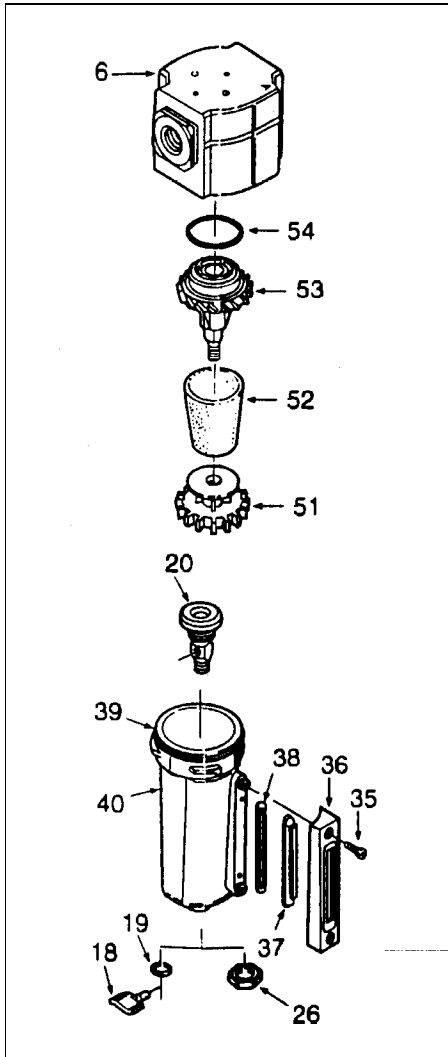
ACCESSORY AIR FILTER ASSEMBLY 12088
